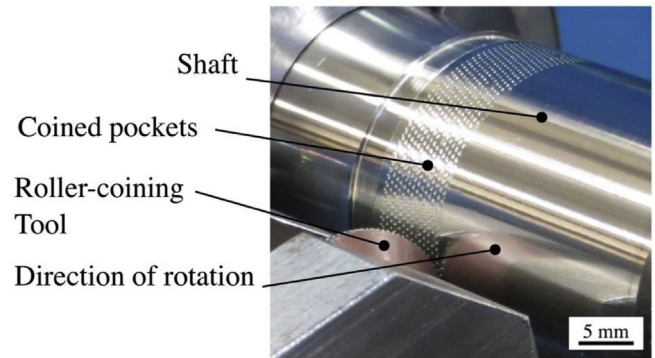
Roller-coining of a shaft made of stainless steel (AISI 304).
